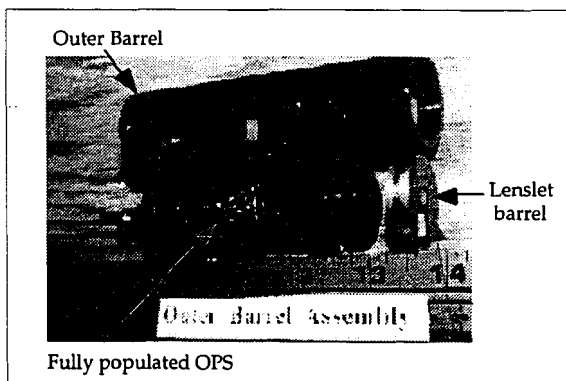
Photo of the Assembled OPS, the Lenslet Barrel, and the Outer Barrel
